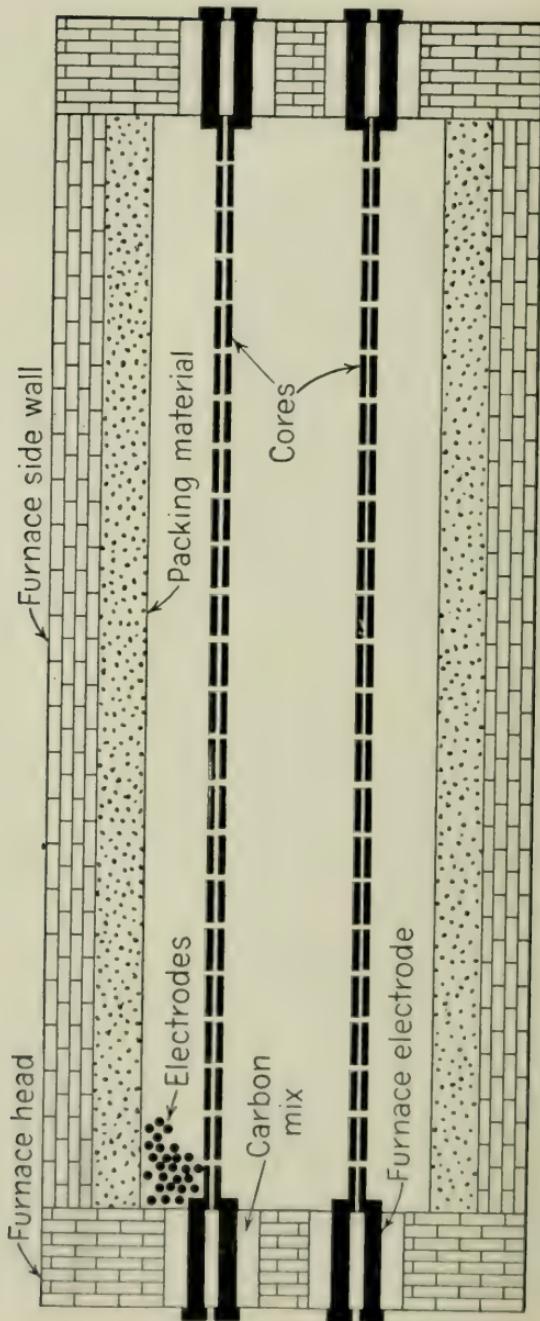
PLAN OF ELECTRIC BAKING FURNACE
